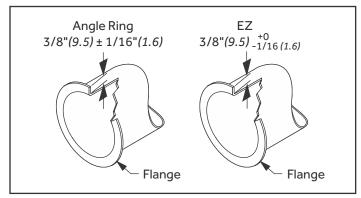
Flange Height Dimensions & Tolerances
